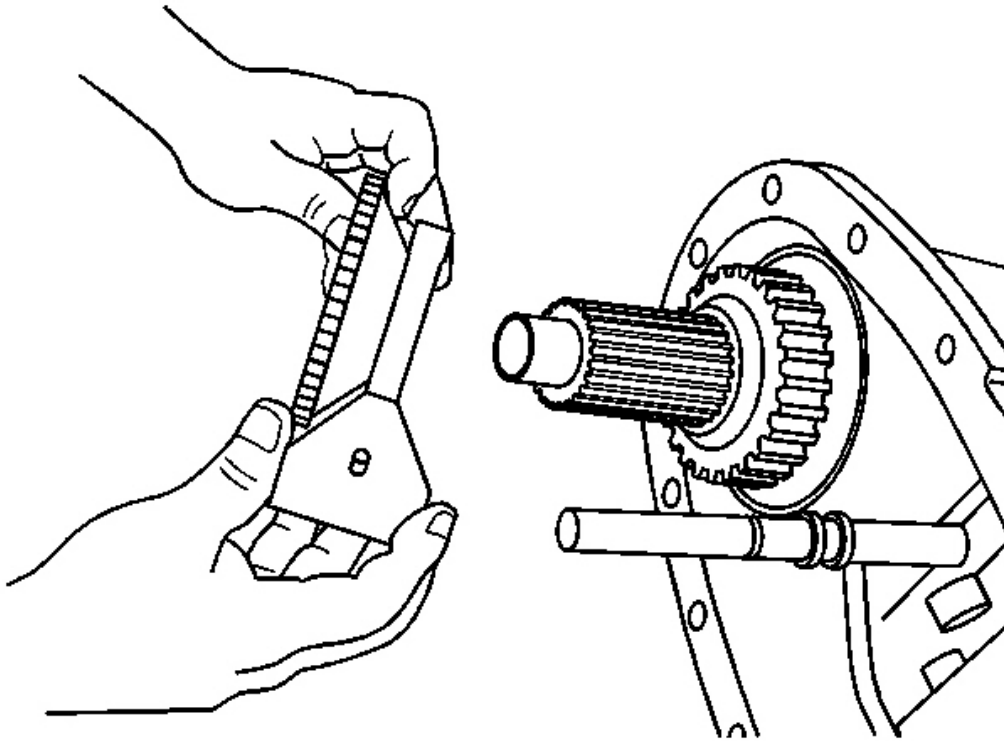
Removing Retaining Ring For High/Low Shift Fork
